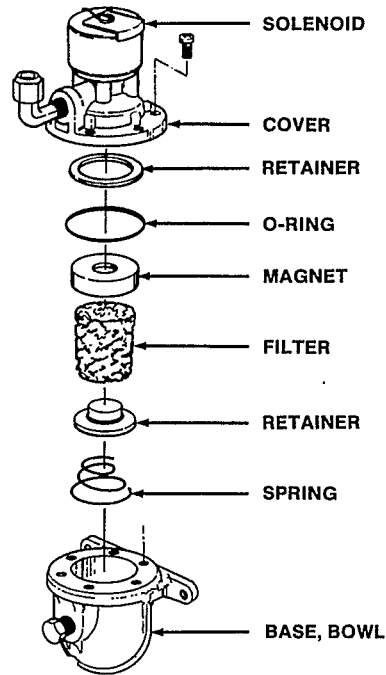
FUEL SOLENOID VALVE AND FILTER
